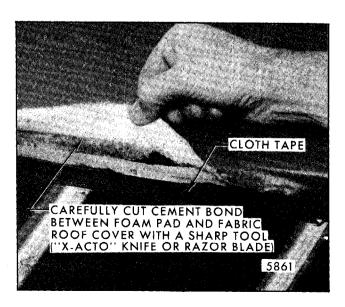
Cutting Cement Bond Between Roof Cover and Foam Pad
